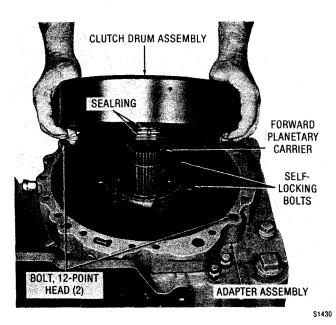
Installing high-range clutch drum assembly (TRT-3 underdrive)
